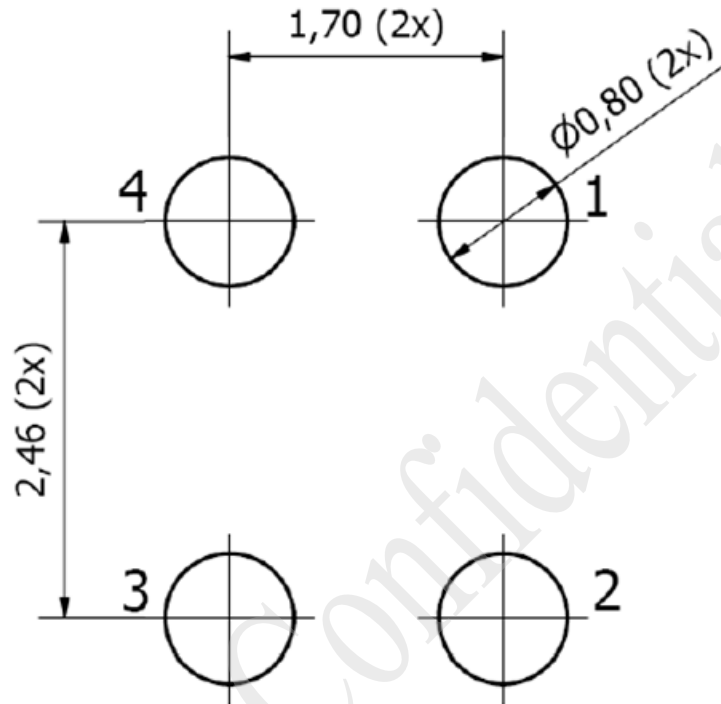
Top view of recommended PCB land pattern (unit: mm)
